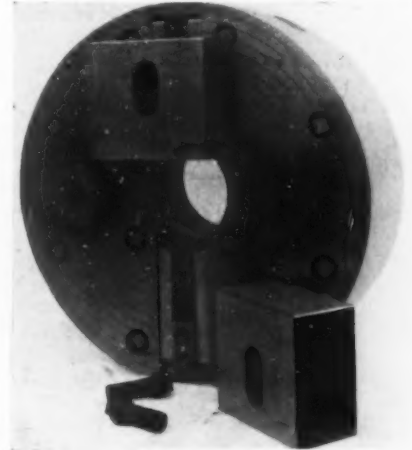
Herbert 2-jaw "Concentric" Chuck, here shown with soft rectangular jaws which can be shaped to conform with the outline of the work-piece.
